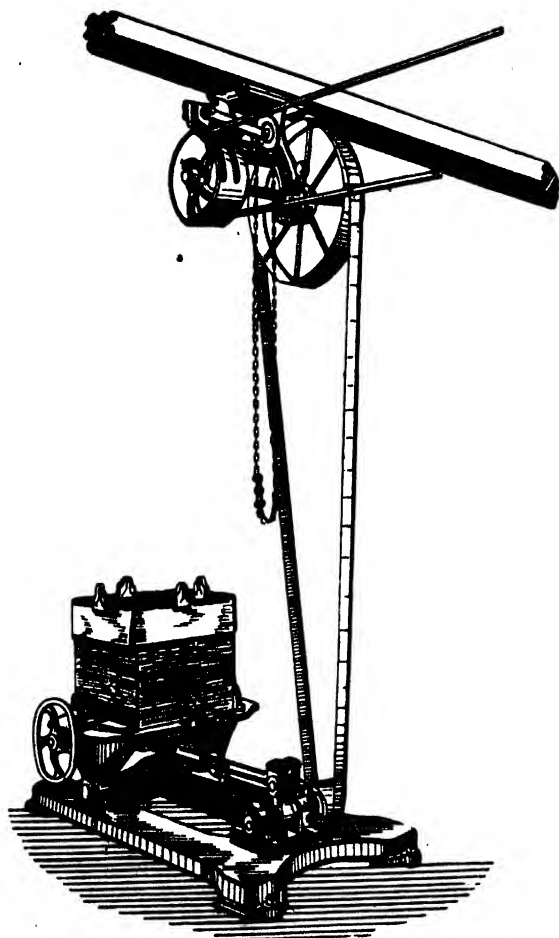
Power Tea Packing Machine with Special Countershaft
